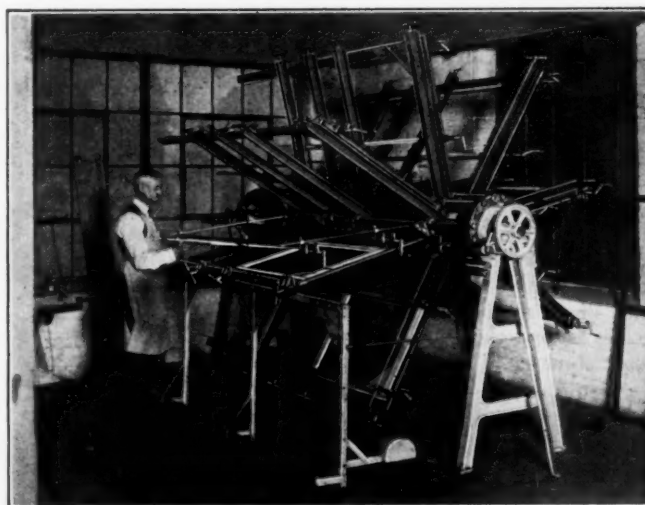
CLAMP CARRIER WITH SQUARING AND FRAMING DEVICE INCLUDING END CLAMPS, GLUING SHOW-CASE FRAMES
